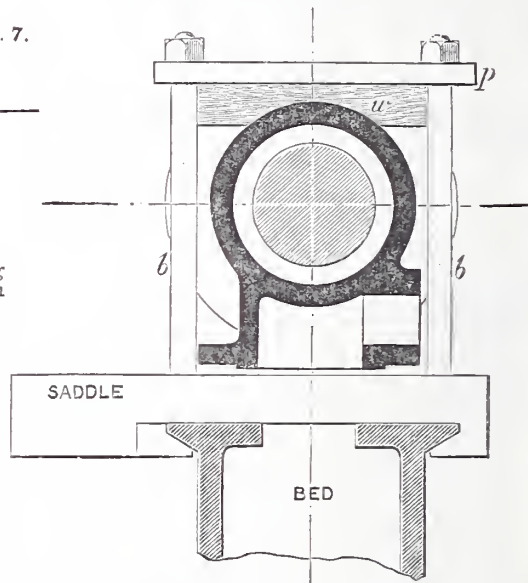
End Elevation and Cross Section of Fig. 4, showing Straps in Position.
